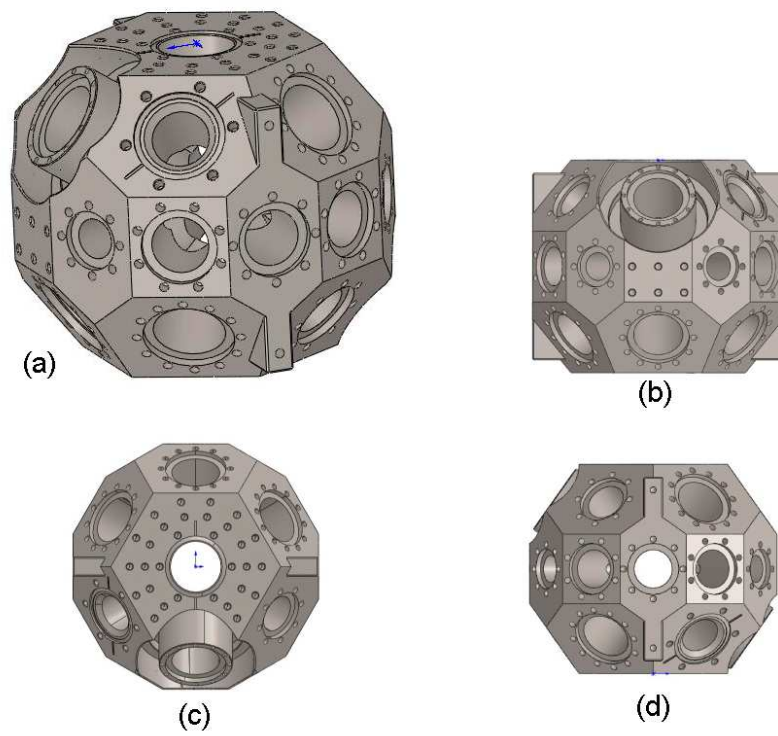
Space Atom Interferometer* main chamber four views [108, 135]. (a) 3D-view, (b) magnetic coils side, (c) top (bottom) view, (d) side machined for additional mechanical supports.
